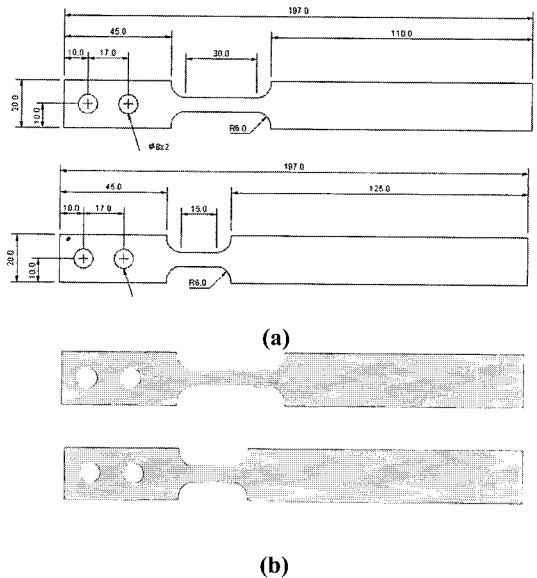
The specimen for the intermediate tensile test; (a) schematic description; (b) photograph
